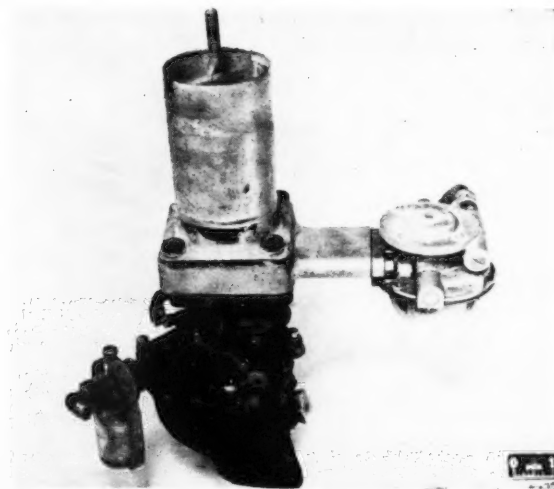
(Left) Alcohol-water injection equipment installed on carburetor of GMC model 270 engine • Fig. 2 (Above) Schematic drawing of alcohol-water injector
